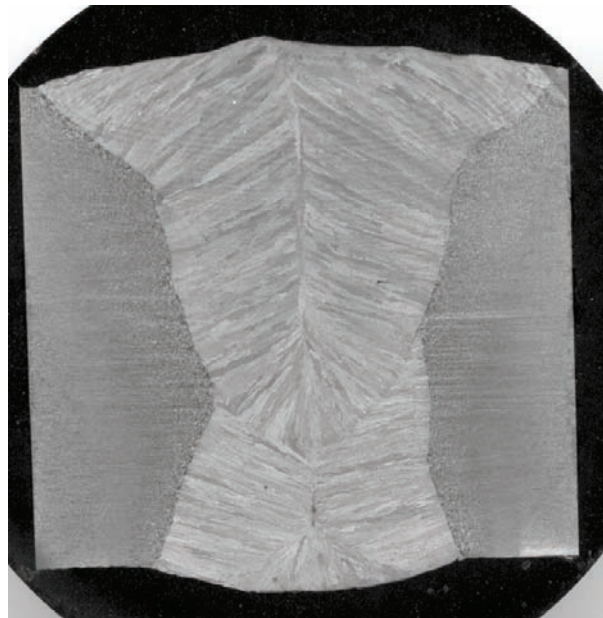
1" HSLA-65 One-sided Weld, Lincoln MIL800-H – Cap Side
